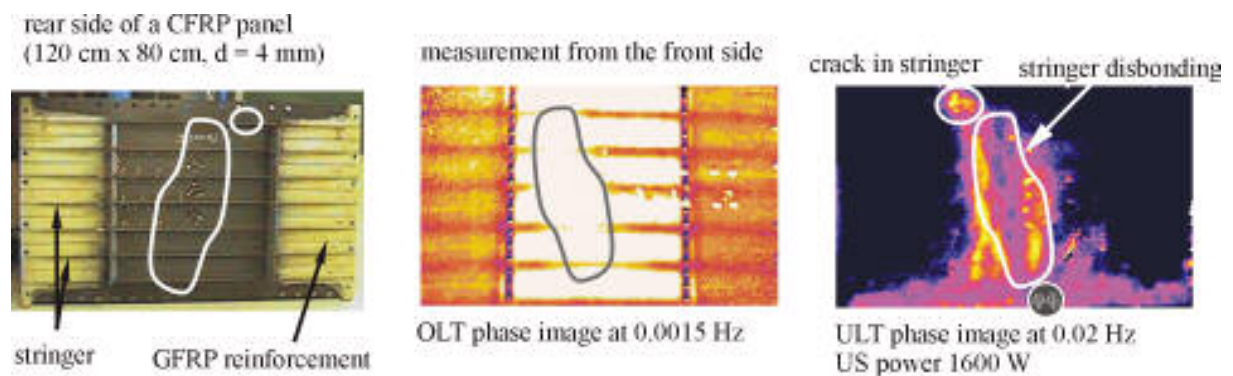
Stringer disbonding and cracks in a Do 328 panel.
